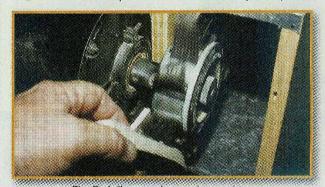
A flap sander can be used to smooth the pieces, once shaped.
